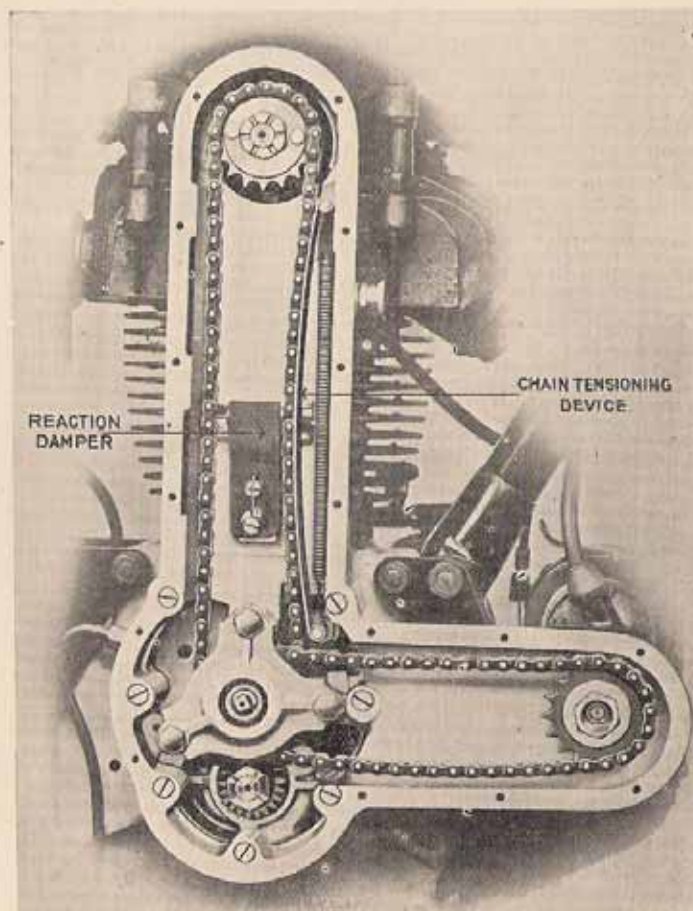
A VIEW OF THE 3-49 H.P. OVERHEAD CAMSHAFT ENGINE
